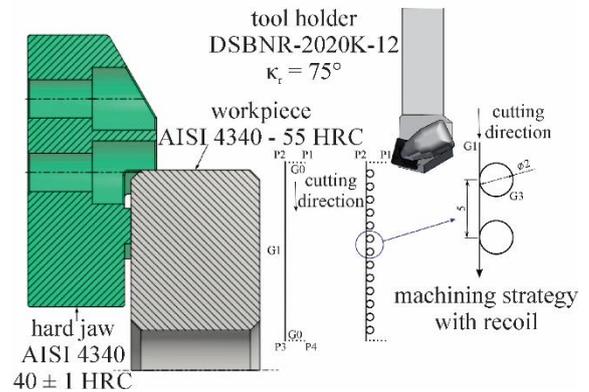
(a) Conventional turning; (b) turning with recoil (woodpecker machining strategy).
